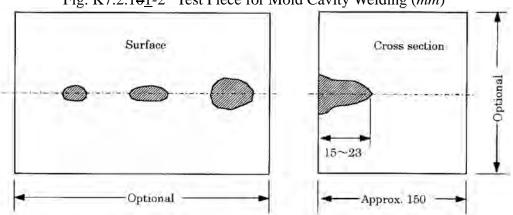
<u>01</u>-2 Test Piece for Mold Cavity Welding (*mm*)
